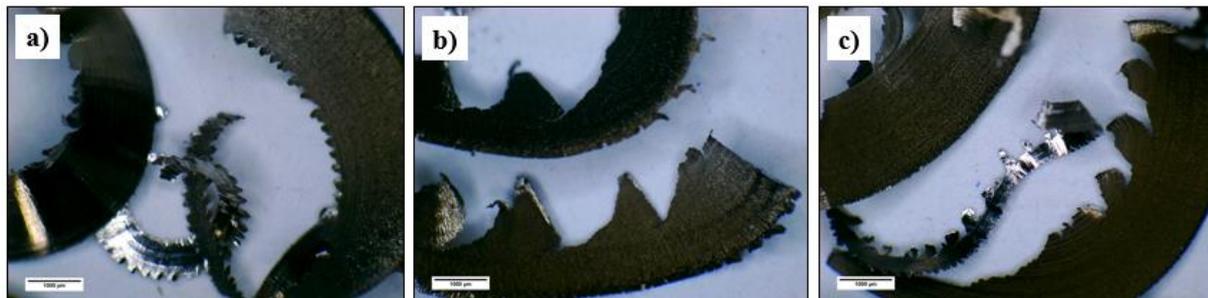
Segmented chips with serrated type obtained to all cutting speeds. a) v_c 60 m/min; b) v_c 80 m/min; c) v_c 100 m/min.
